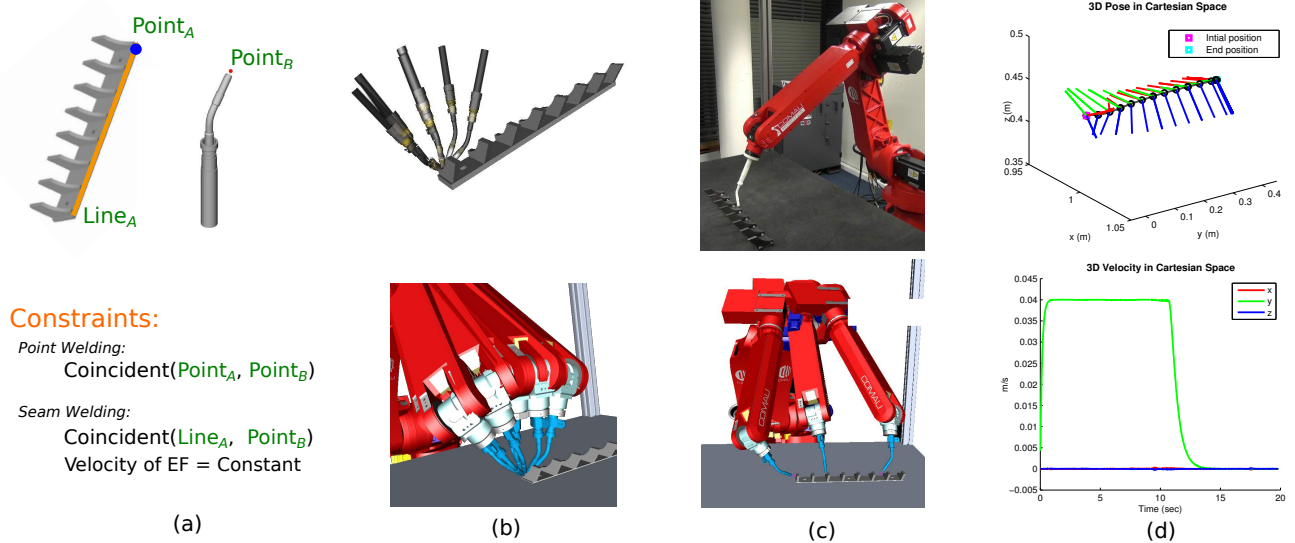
Welding in a robotic workcell: (a) Task constraints, (b) point welding, (c) seam welding in simulation and real experiment, (d) 3D end-effector trajectory and velocities for robot end-effector.
